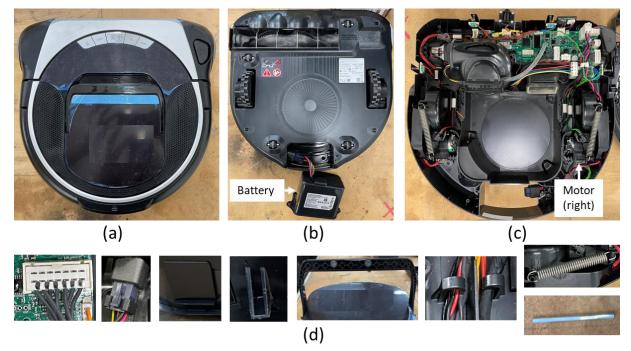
(a) Bosch Roxxter robotic vacuum cleaner, with the following critical components: (b) Battery, (c) Motor, and (d) Connectors (clockwise from top left - PCB connector, cable plug, Snap-Fit 1 & 2, hinge, cable hook, spring & metal pin)
